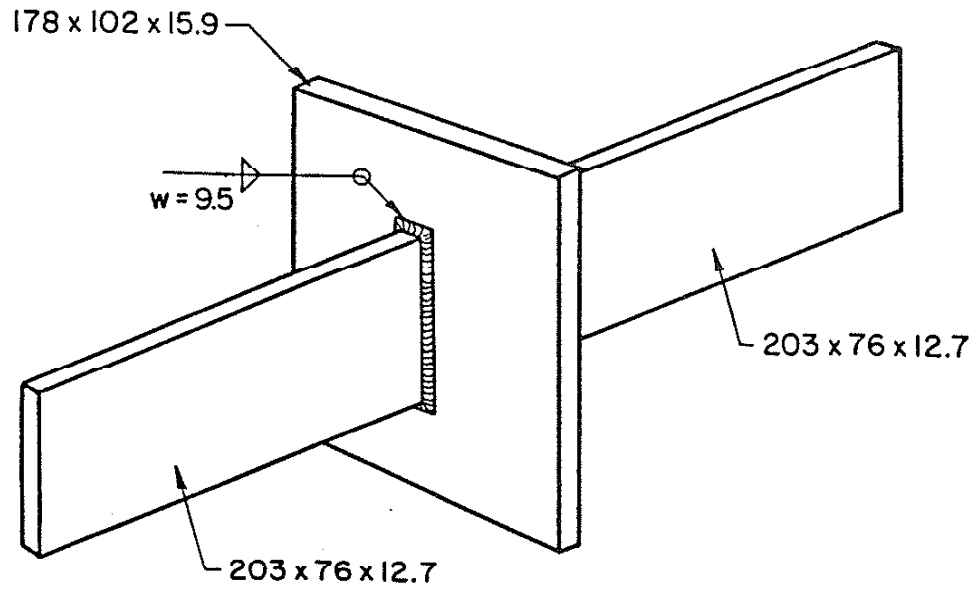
Geometry and dimensions for testpieces of load-carrying cruciform weldments used in this study. (Dimensions in mm.)
